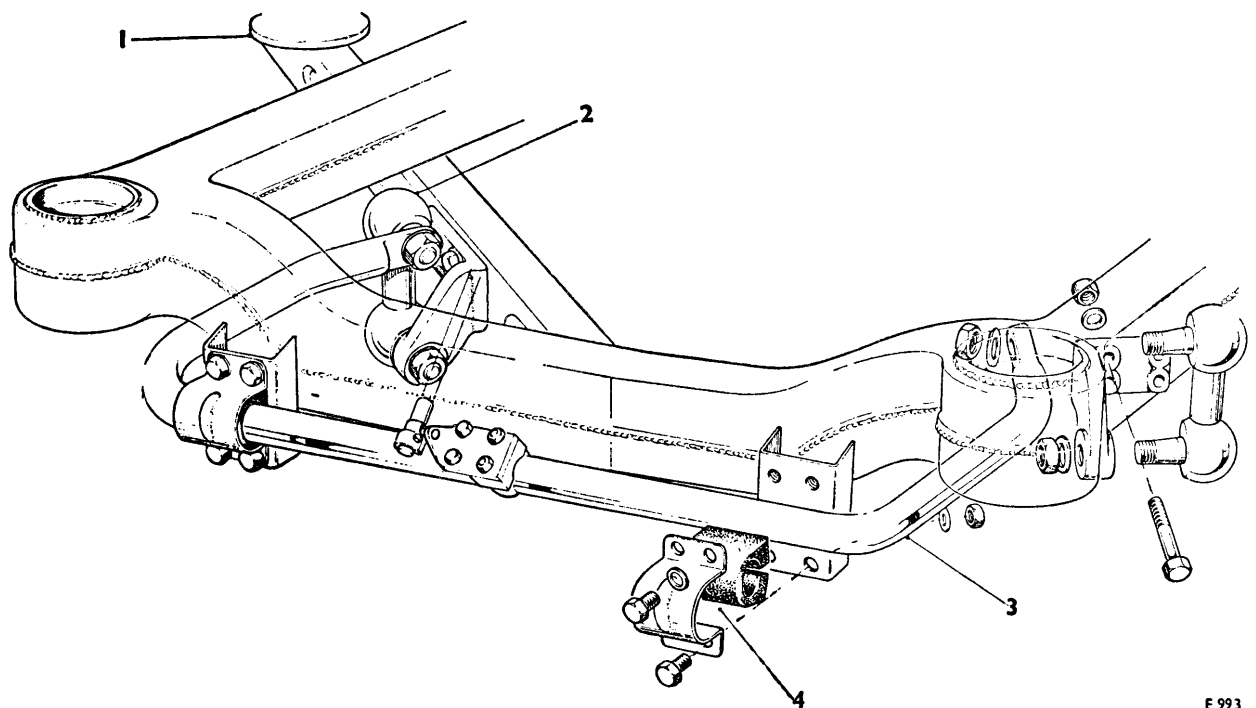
EXPLODED VIEW FRONT STABILISER BAR
